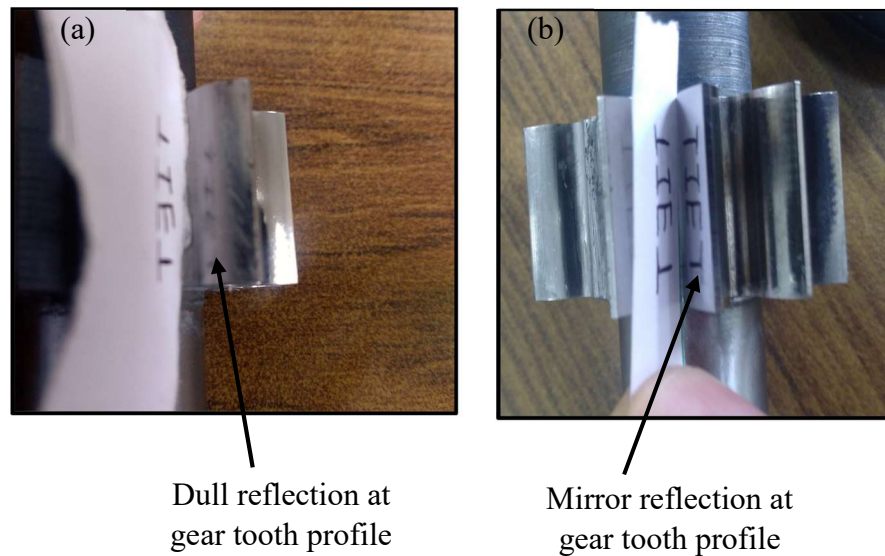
Mirror image of gear teeth profile (a) after gear grinding and (b) after MR finishing in 20 minutes
